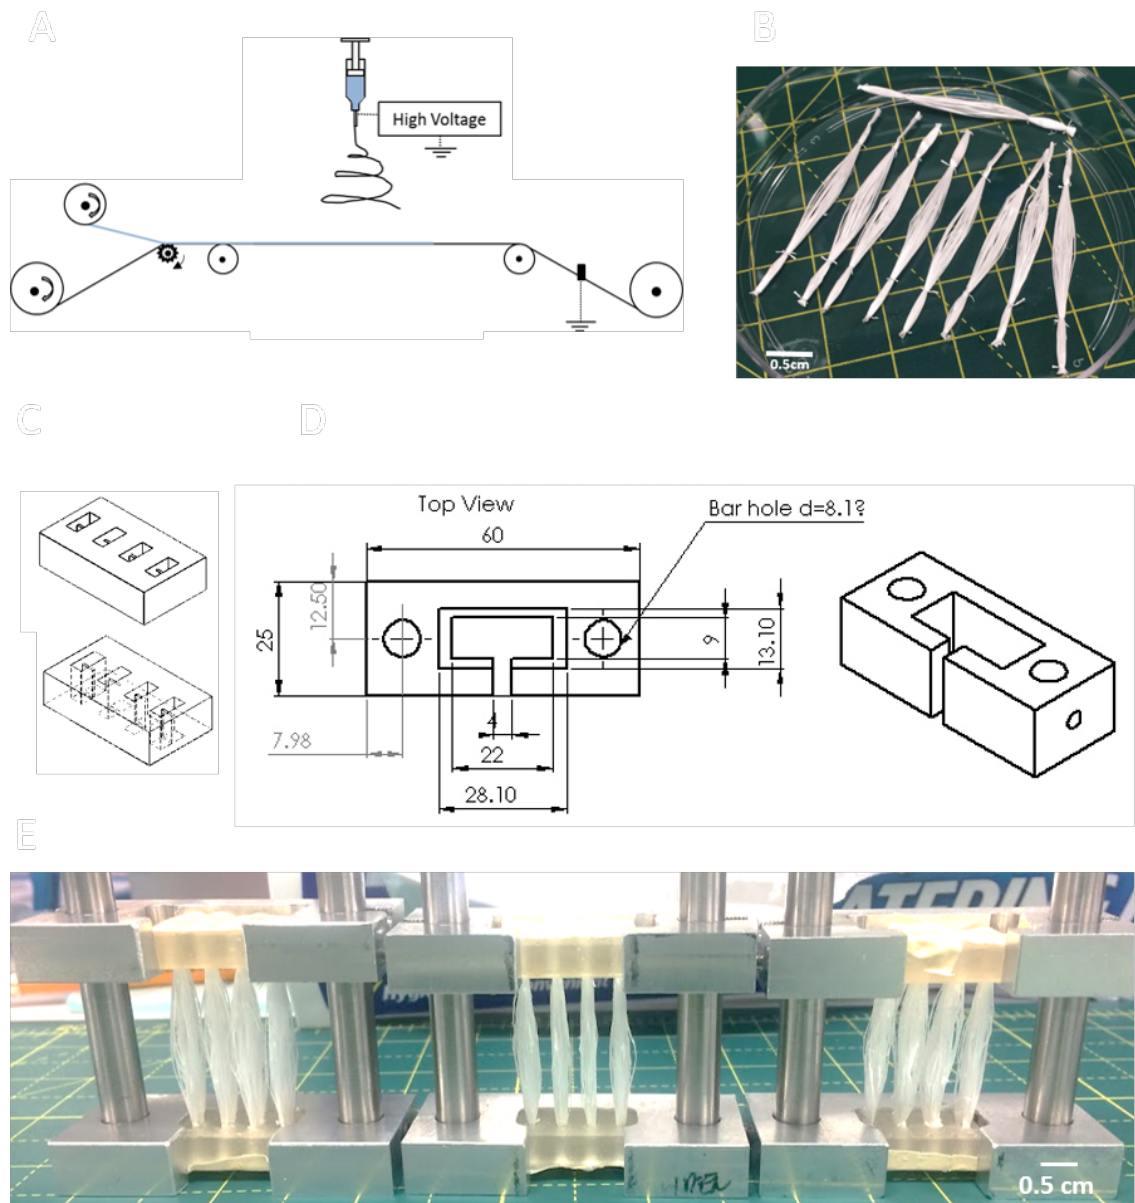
Scaffold Preparation. A) Electrospinning technique to obtain filaments. B) Stretched filaments assembled into bundles. C) Technical drawing of assembly stage. D) Technical drawings of 3D printed inserts. All dimensions are given in mm E) Full assembly ready for sterilization and seeding. Bundles are taped into the inserts and held in a stretched position through adjusting the distance between top and bottom of assembly stage.
